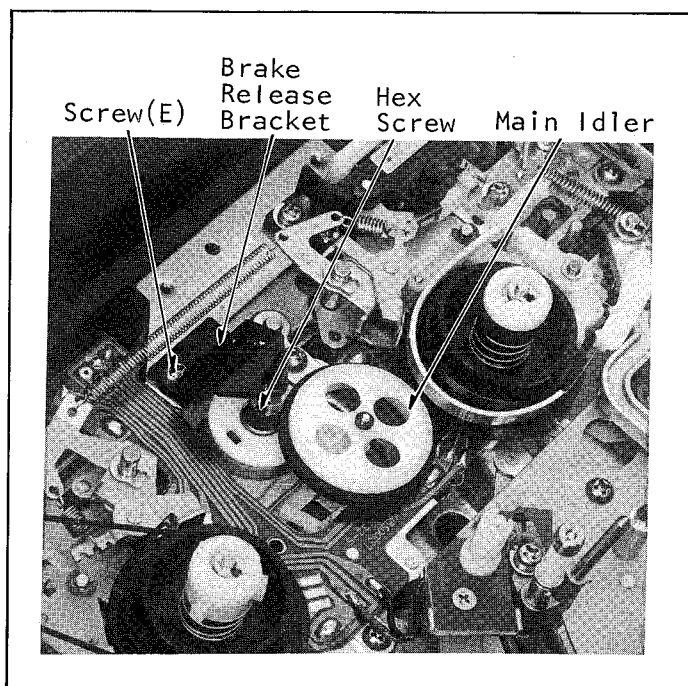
Adjustment of Cam Gear and Mode Select Switch - (11)
